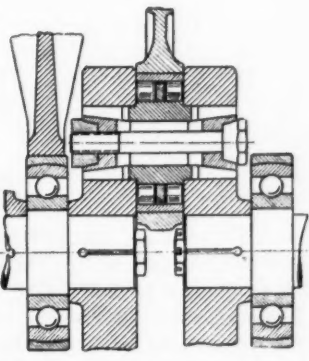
Roller bearing with cylindrical crankpin (Bolle-Fiedler)
